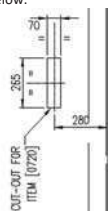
cut-out left in diverter shell after removing existing seal air flange 13-0770
